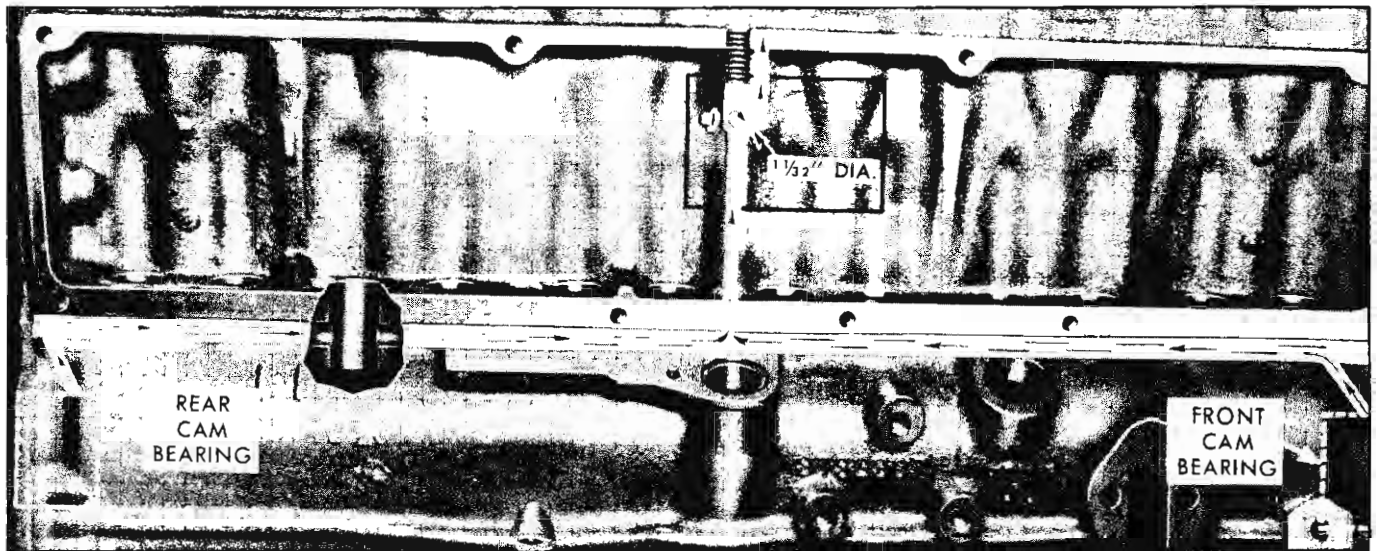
Oil Passages from Camshaft Bearings to Rocker Arm Assembly
